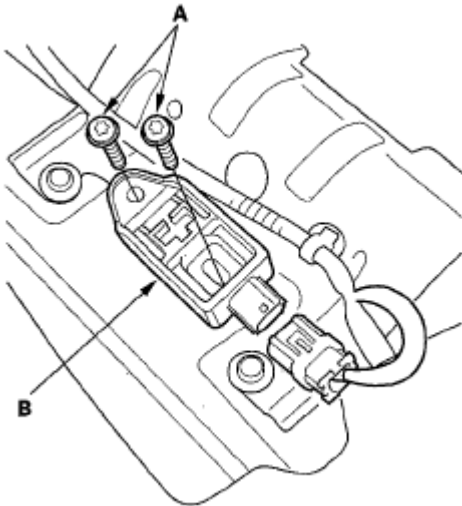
Identifying Rear Safing Sensor And Fasteners
